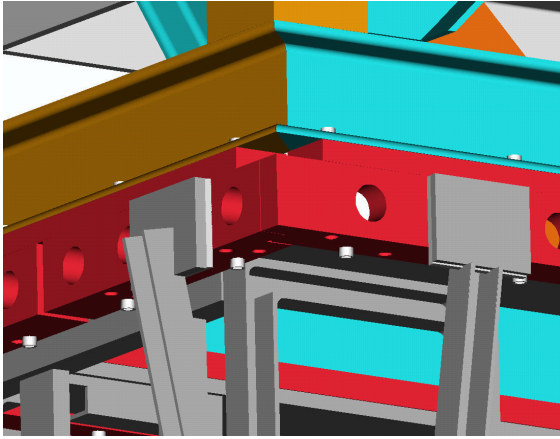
Cap head screws connecting implementation ring to lower structure top plate.
